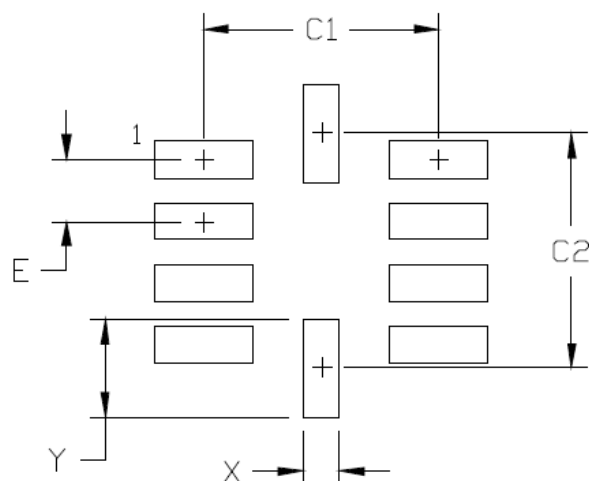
2 x 2 mm DFN PCB Land Pattern
